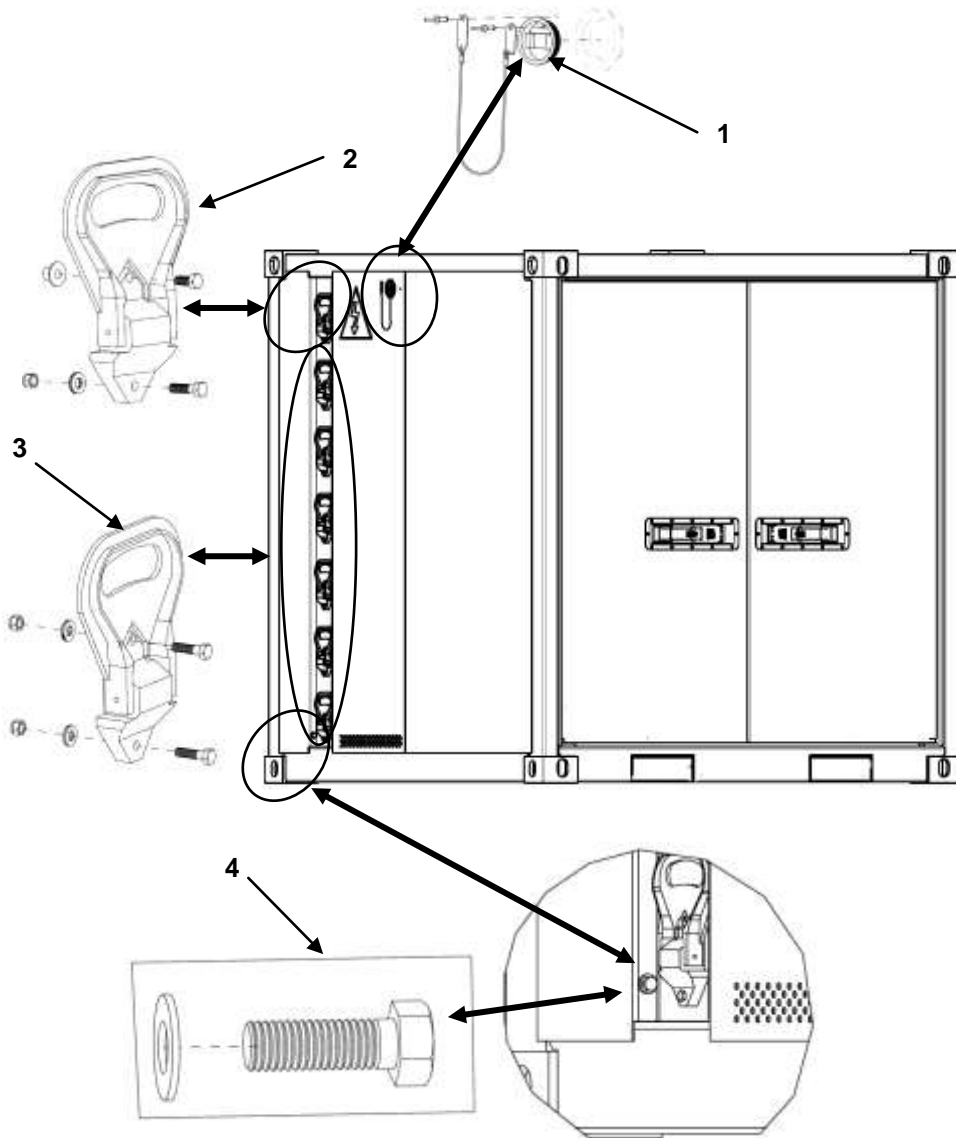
FPU-8-2CONTAINER EXTERIOR PARTS
